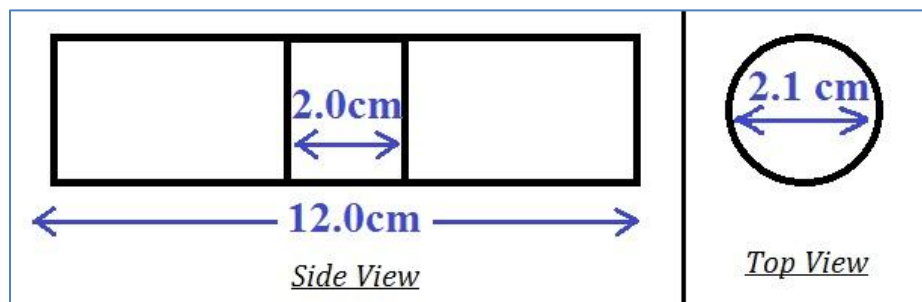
Blueprint Drawings of the Generator's Cylindrical Tube Design for Side and Top Views
